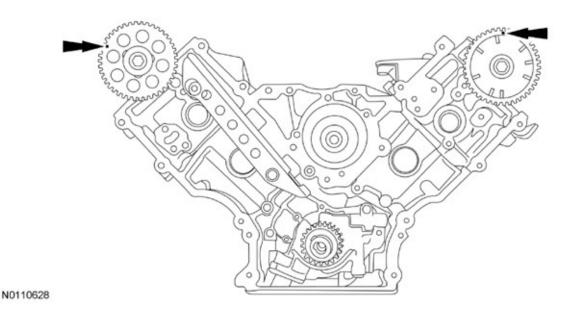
Locating RH And LH Camshaft Sprocket Timing Mark Courtesy of FORD MOTOR CO.
